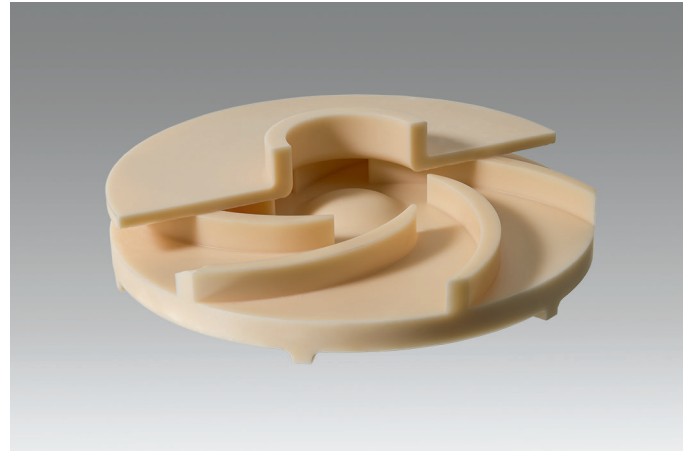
Diffusion welded pump impeller made of aluminium oxide FRIALIT F99.7
